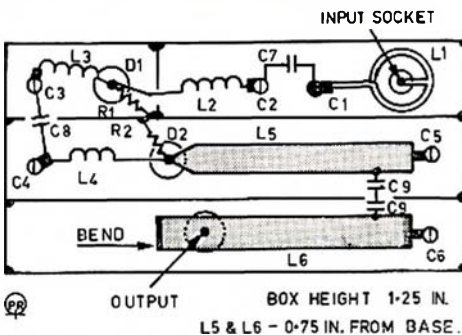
BOTTOM LAYOUT OF DOUBLER-DOUBLER
